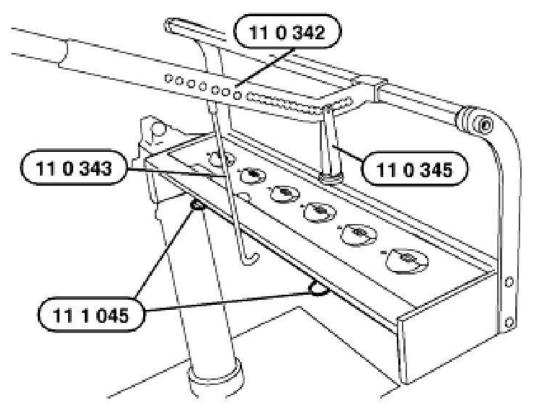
Identifying Special Tools For Removing Valve Springs Courtesy of BMW OF NORTH AMERICA, INC.
